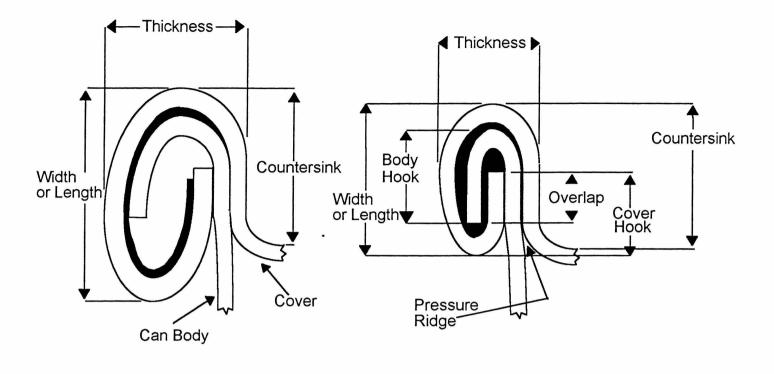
Cross sectional view of seamFigure 35.Fully formed seamfollowing first operation.following second operation
